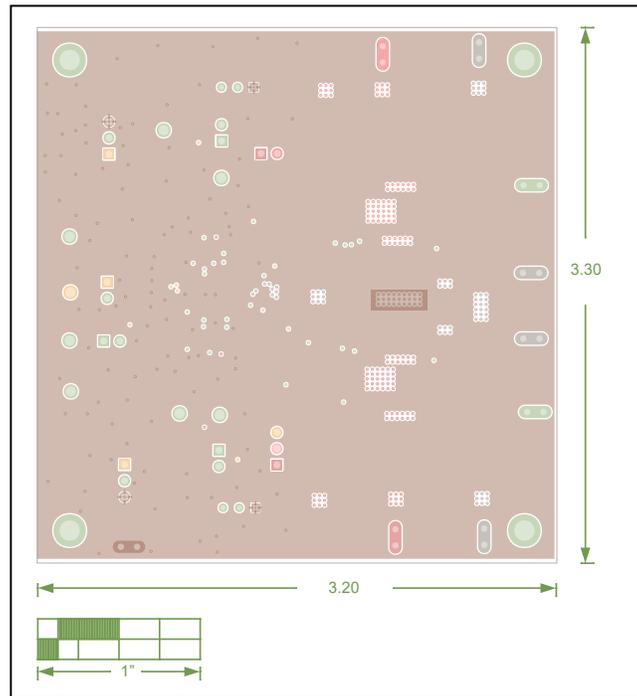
MAX20097 EV Kit PCB Layout—Inner Layer 1
